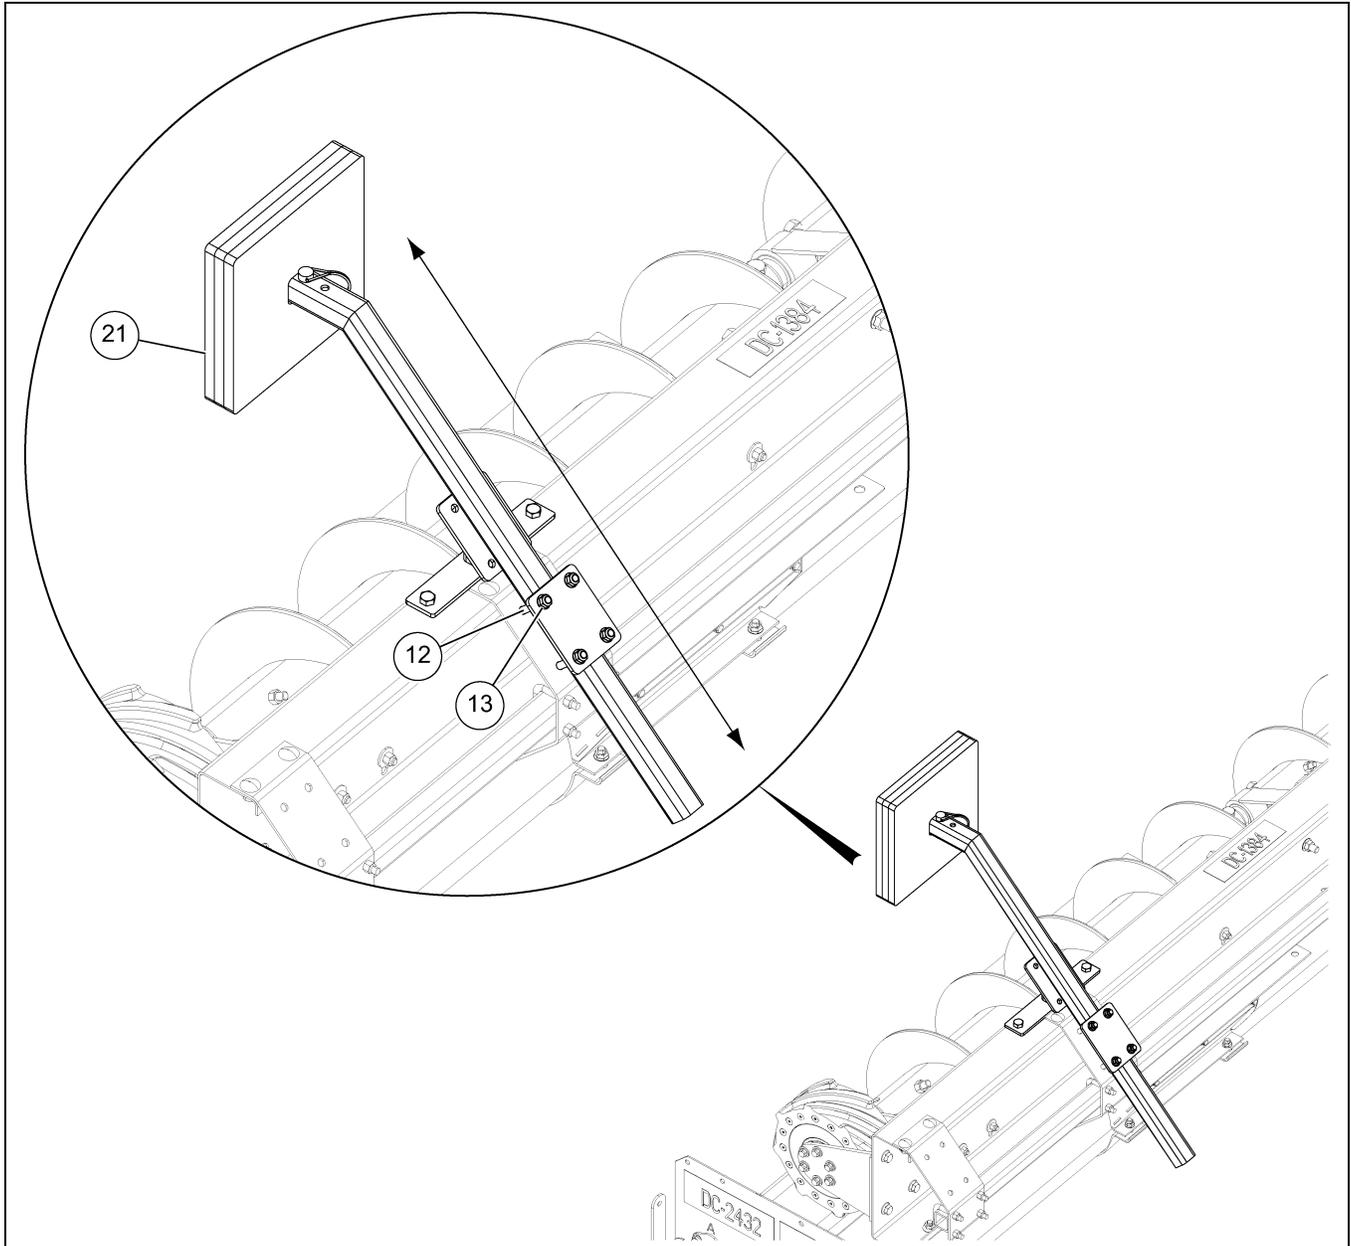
Adjusting the Backshield Counterweight Kit Assembly
